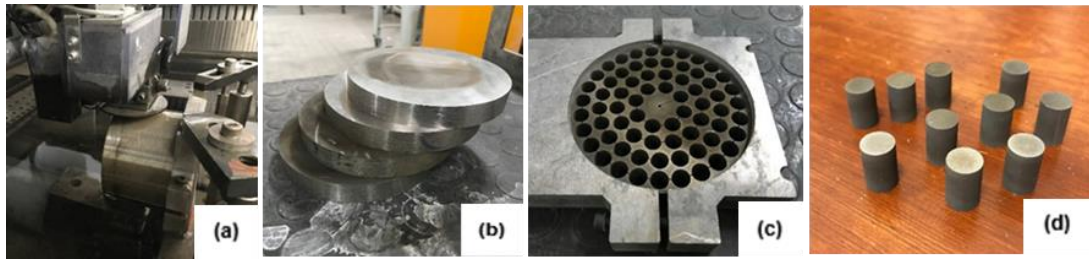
a) Slicing of billet in EDM b) Grinding of sliced billets c) Removing specimens from sliced billet d) Specimens after peripheral grinding
